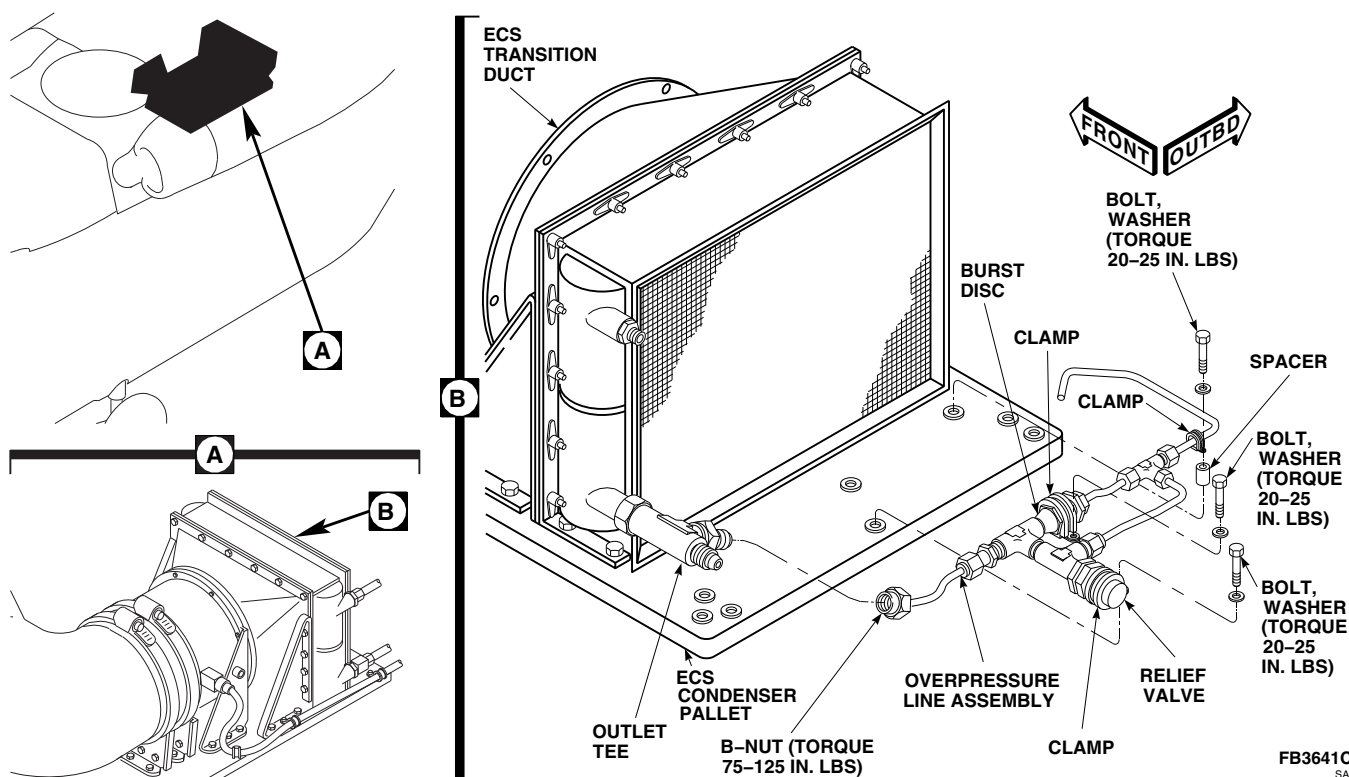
REPLACE ENVIRONMENTAL CONTROL SYSTEM CONDENSER LINES, BURST DISC, AND RELIEF VALVE (BENCH)
